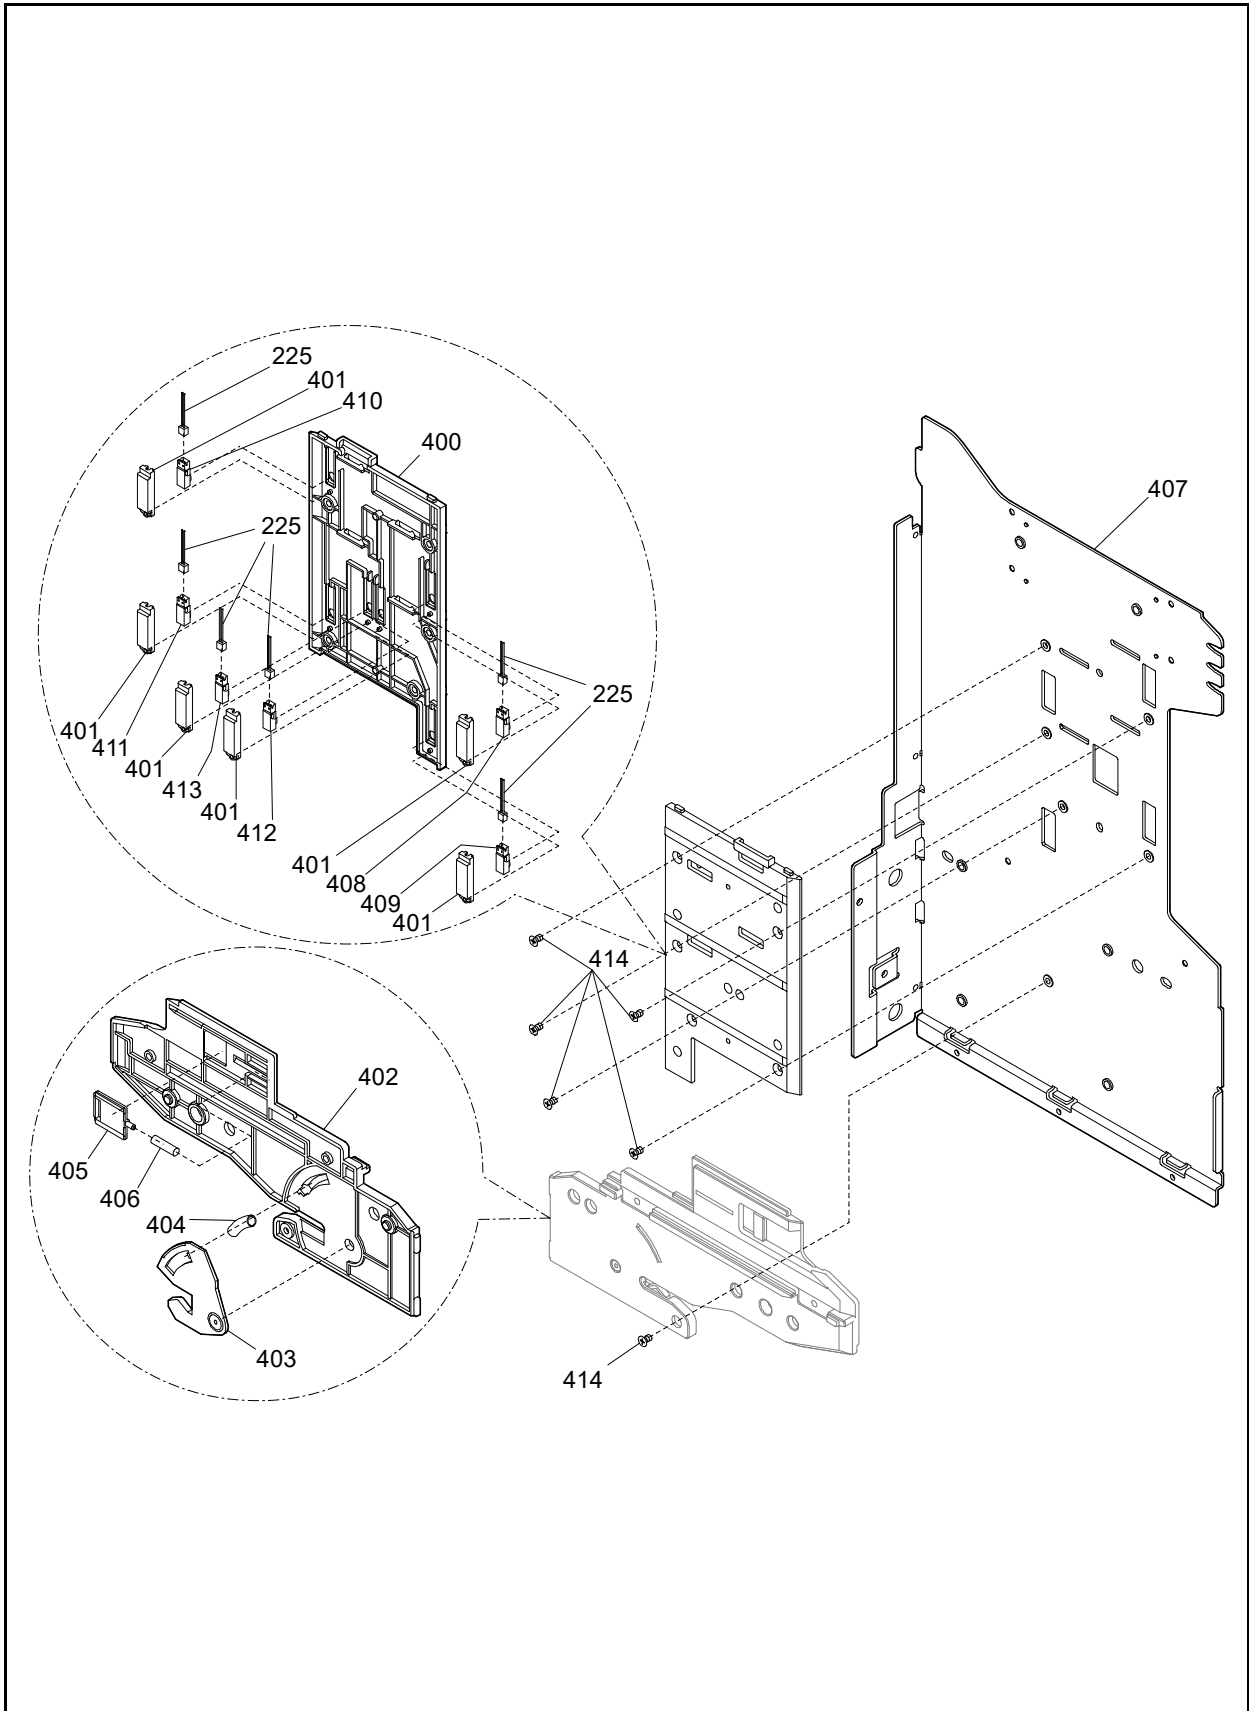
iPRO-RC Frame Unit 4 Exploded View
